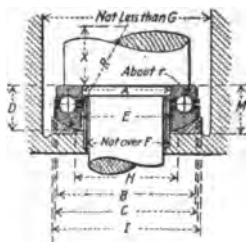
Hess-Bright Thrust Ball Bearing.
